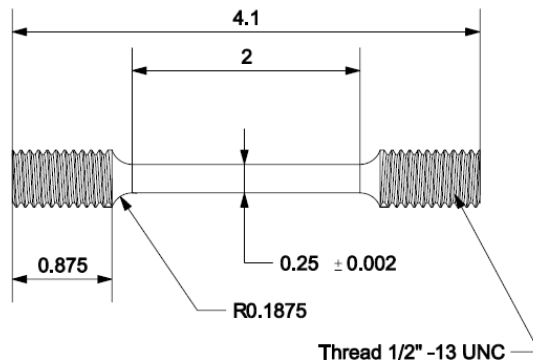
Cylindrical tensile specimen. Dimensions in inch.
